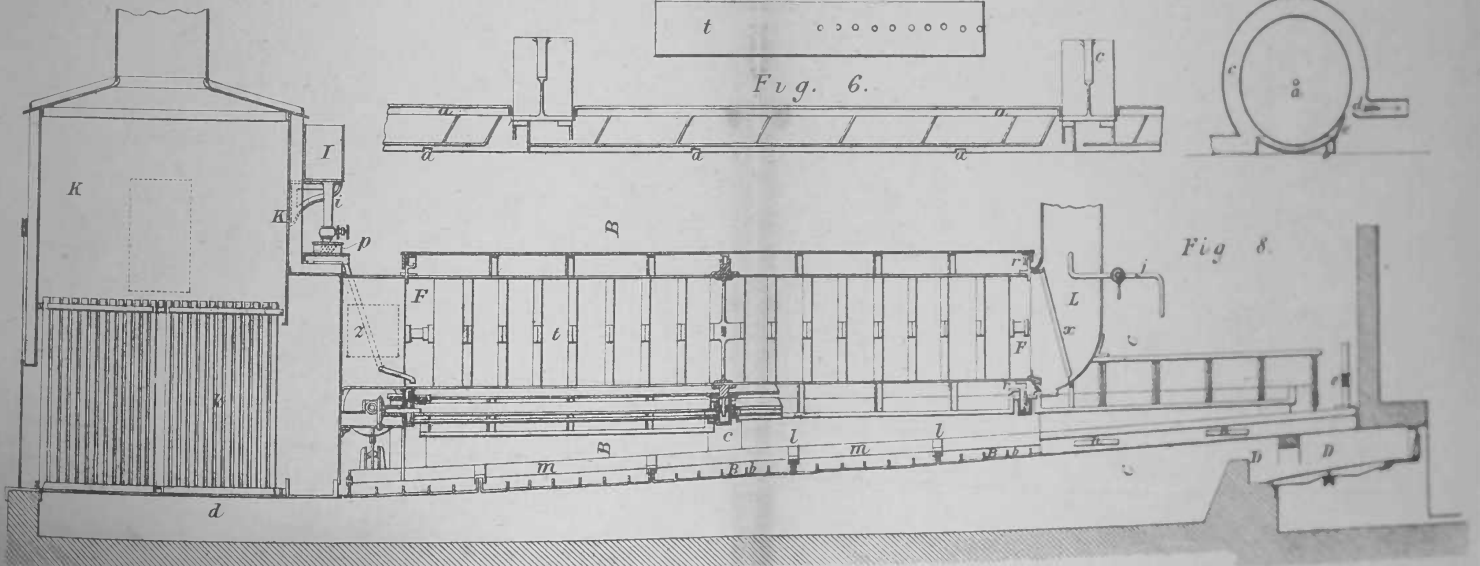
is a plan showing the connecting channels between the trays; and Fig. 4 is a section of one of the trays. The plates A rest on brickwork; B are the trays; C, cast-iron brackets which carry the beams and cylinder; D, the furnace constructed to burn coal. Where bagass or other fuel is intended to be used, it must be modified. *a* is the flue. The plates A lie on the brickwork, are fastened to the brackets C, and support the trays B, allowing them to expand and contract without injuring the brickwork; they also bind and protect the brickwork, and, by their construction, form channels *a* for taking away the water arising from the condensed steam in working. The plates are recessed on their inner edge, to receive projections cast on the bottom corners of the trays. Each of the trays B has a series of curved corrugated channels. Ribs *b* extend from one side to near the opposite side, and make the channels continuous from end to end of each tray. An incline is made from one series of channels to the next, as shown in the sectional view Fig. 4. At the turns of the channels, the corners are filled up by a sloping corner-piece; saddle pieces *l* are dropped over the ends of the adjoining trays. The ends of these saddle-pieces are sloped upwards to support plates *m*, fixed on the sides of the trays. The trays are connected to form one continuous vessel, by open elbow channels *n*. *o* is a gauge-vessel, through which the juice is introduced into the top end of the trays; this vessel is made similar to one which will be further described in reference to *p*, Fig. 8. E are beams fastened to the brackets C, and carrying the cylinder F, made of copper or iron, which has for a central support a belt of double-angle iron *f* fixed upon it; a concentric ring is fastened on the inlet end of the cylinder, which it serves to strengthen, support, and drive. The external periphery of the ring is a toothed wheel *g*; the central part of each tooth is cut away so as to leave two rows of teeth and a plane intermediate portion, which rests upon two anti-friction
